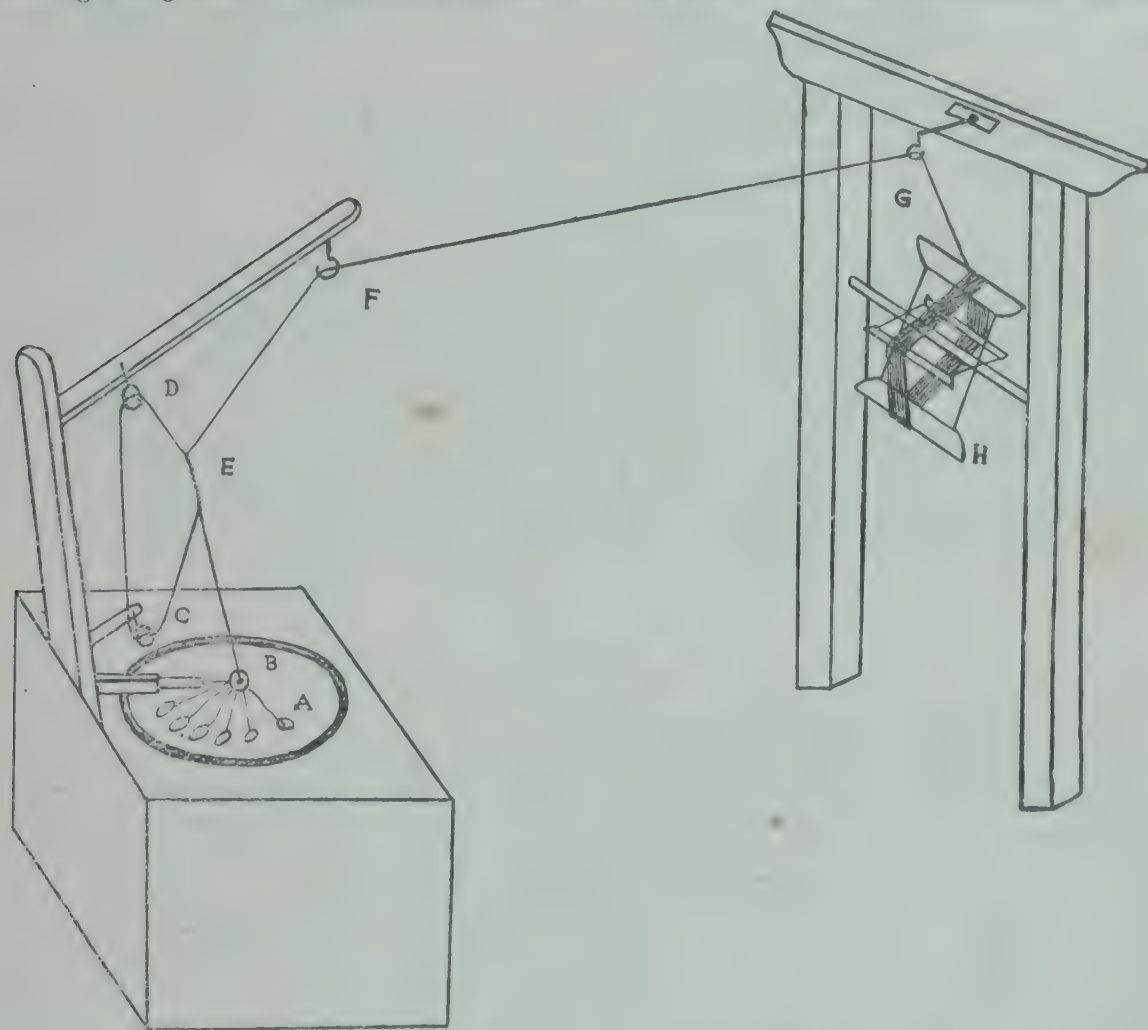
How silk thread i.e. raw silk is reeled out of cocoons. Cocoons, A, are boiled in hot water in basin, B. Filaments of several cocoons are passed together through the eye of the reeling button to make up the thread which goes over pulley D and is then wound over itself many times at E (croisure) and is then passed over hooks F and G to reel H which is kept turning and thus winding the thread on itself.
